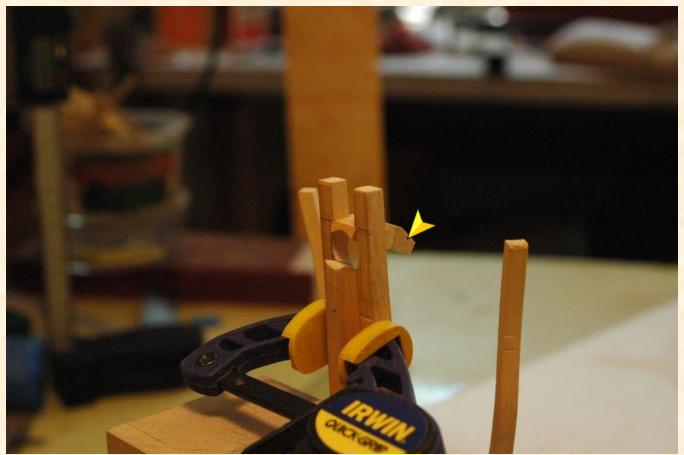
the cross chock was made extra long so that it could be slid in until the taper fit just right and the ends could then be marked and cut off
